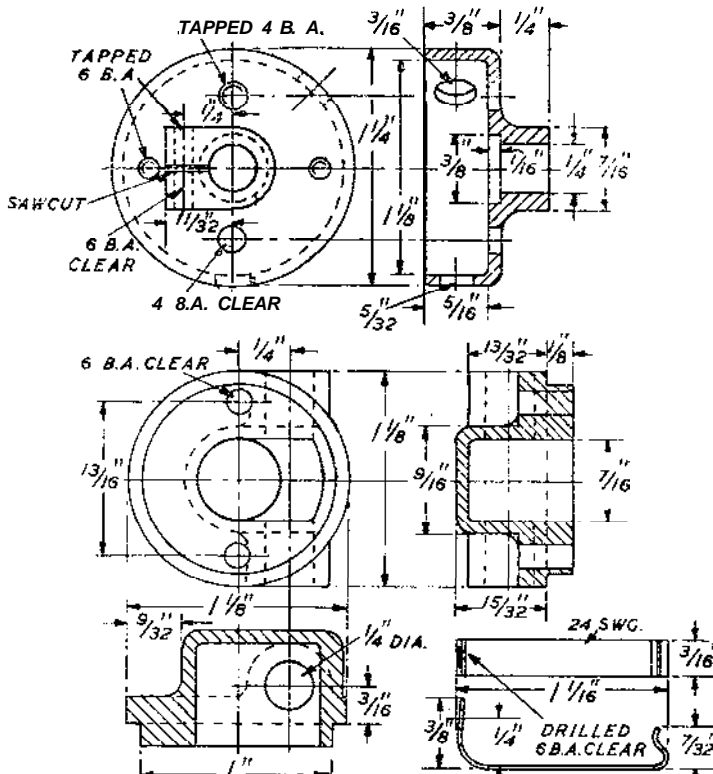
Spiral gear housing, modified contact-breaker casing, and spring clips for securing distributor
